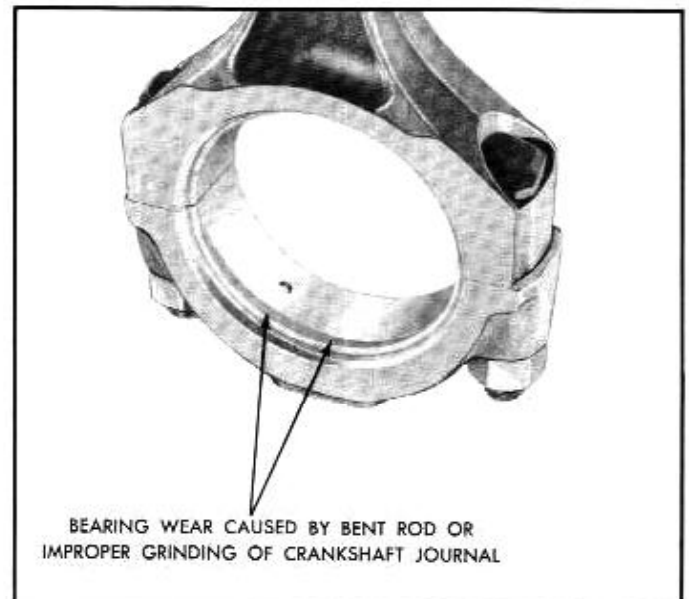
C-88—Wear Pattern on Connecting Rod Bearing
